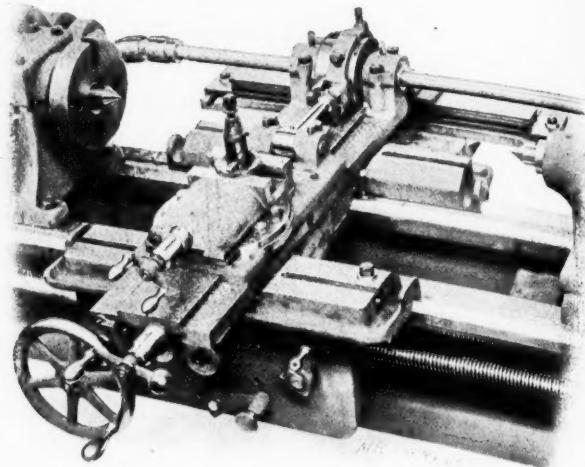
Rear View of Lathe fitted with Irregular Turning and Boring Attachment.
